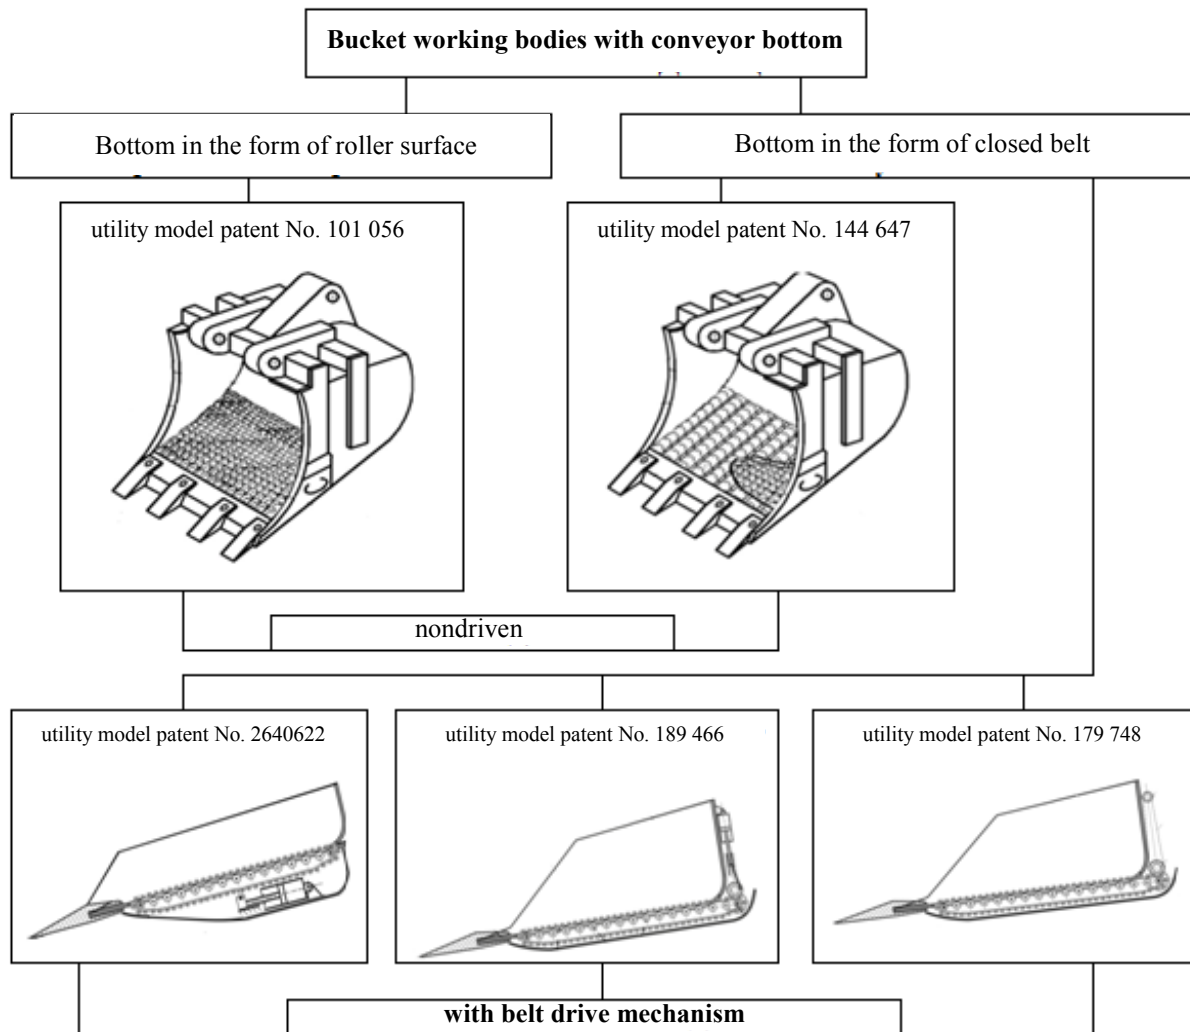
Systematics of bucket working bodies with a conveyor bottom
